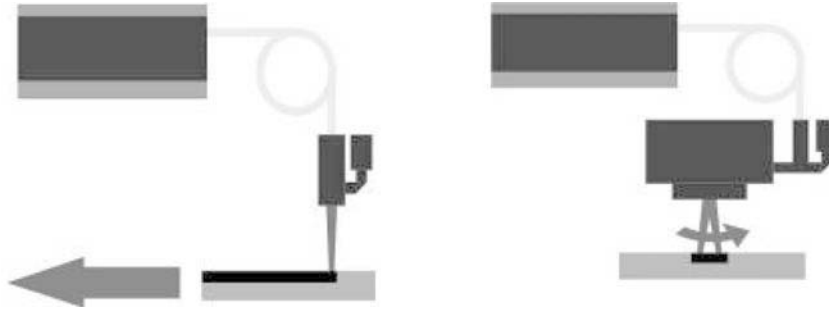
Positioning of the laser beam for micro-welding.
